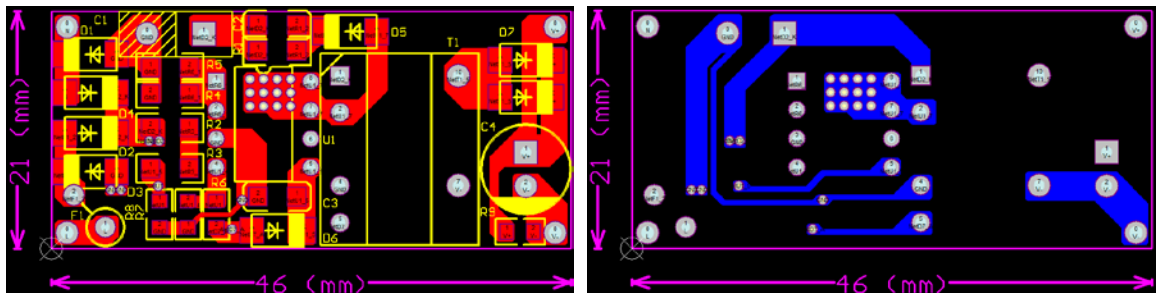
PCB LAYOUT (46MM*21MM*1.2MM)
